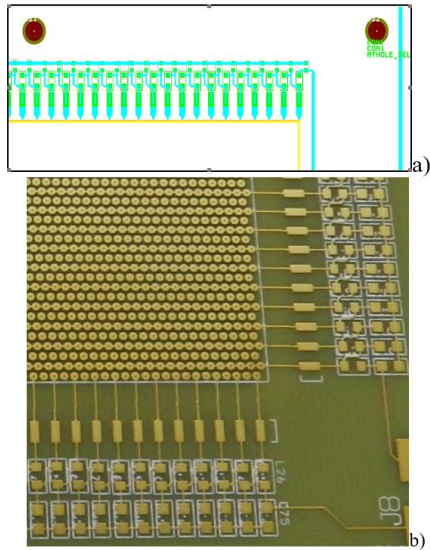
a) Gerber display of readout grid with LC mounting pads and b) Readout PCB for GEM
